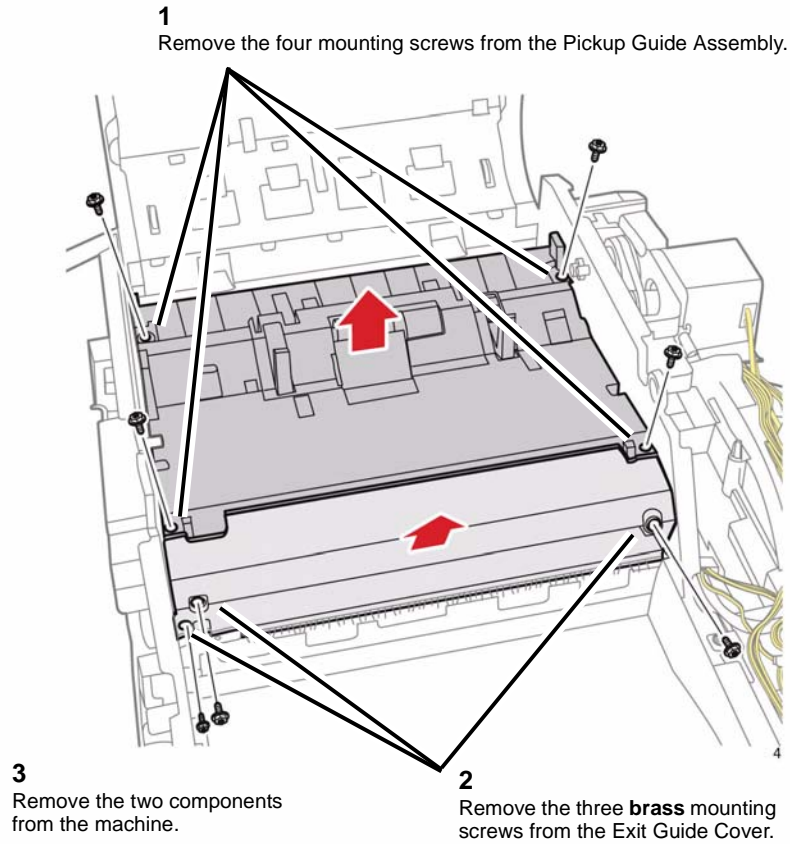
Removing the Pickup Guide Assembly and Exit Guide Cover
